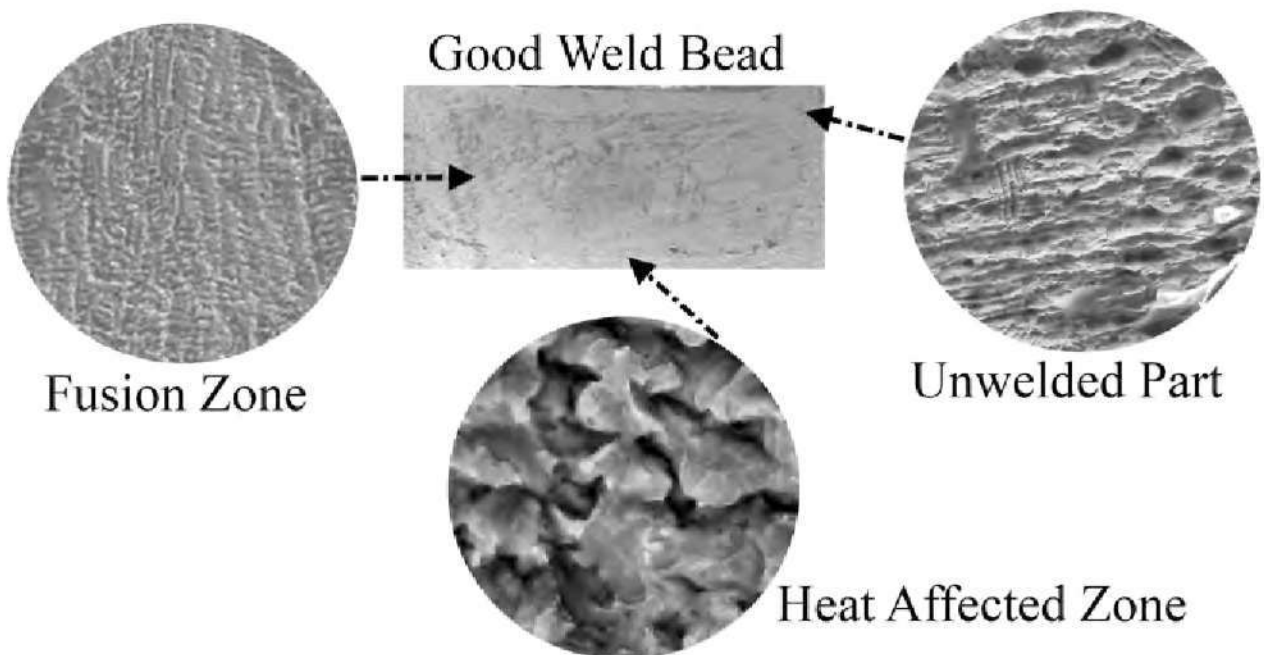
Macrograph of a goodly-formed weld bead
